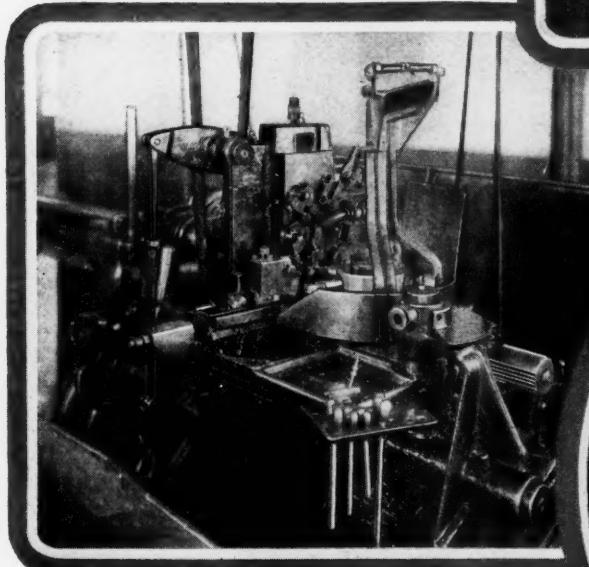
A Machine that Assembles Small Collars on a Bar, and also Takes Facing and Turning Cuts
